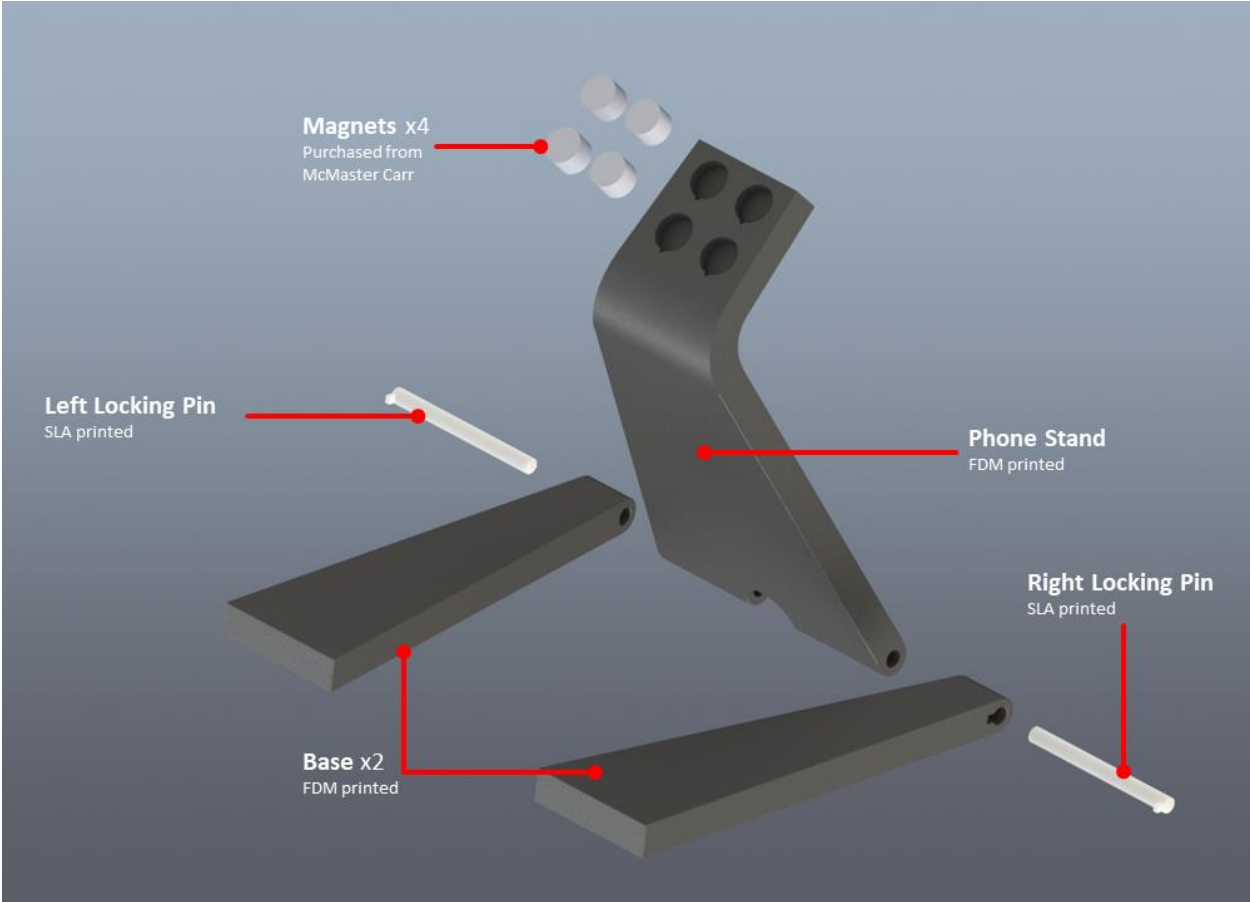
Render of exploded view to see more of the part geometry with description of main parts
